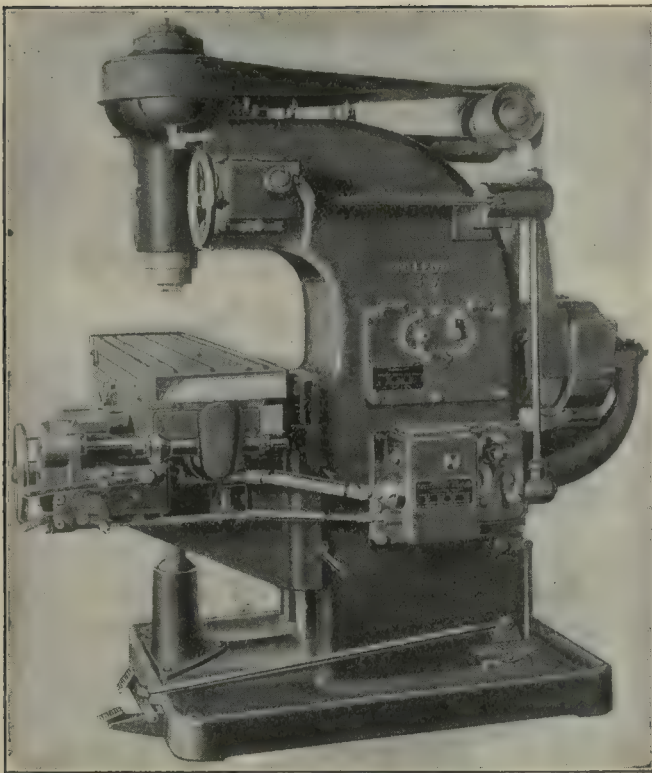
TOLEDO VERTICAL MILLING MACHINE, SIDE
